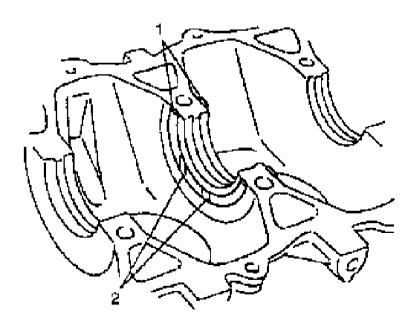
Checking Crankshaft Thrust Play Courtesy of SUZUKI OF AMERICA CORP.
